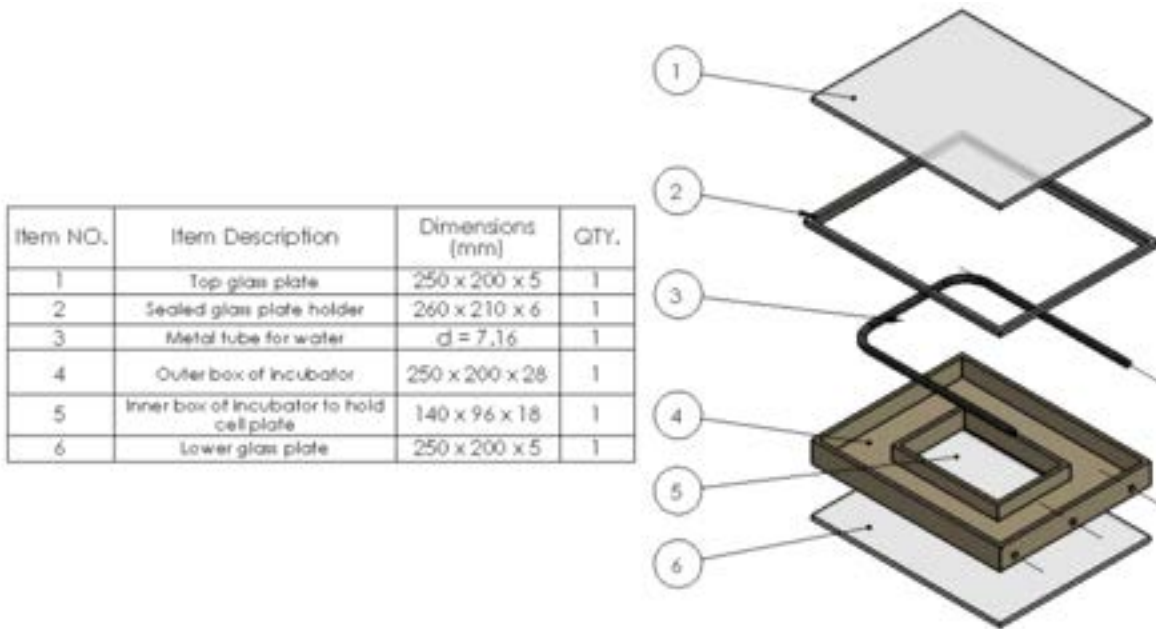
Exploded view of the Solidworks drawing showing the part names and descriptions.
